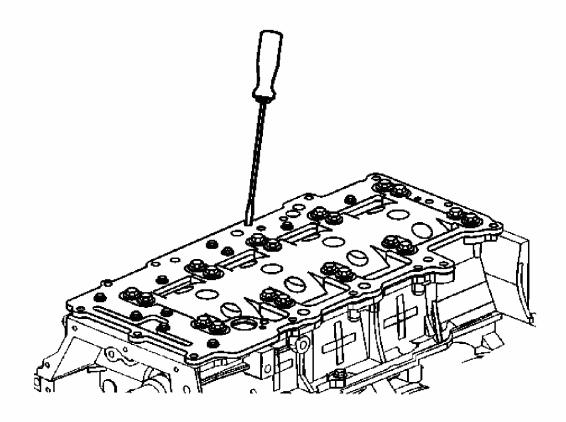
Cleaning Out Sealant In Oil Drain Back Passages Courtesy of GENERAL MOTORS CORP.
